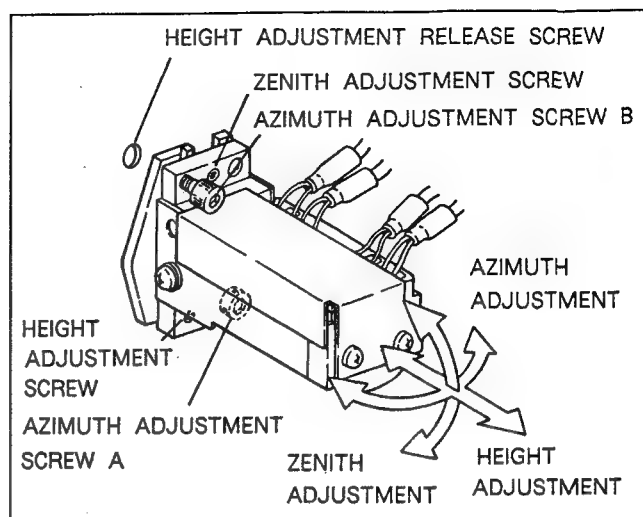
Audio/CTL R/P Head Adjustment Screws
